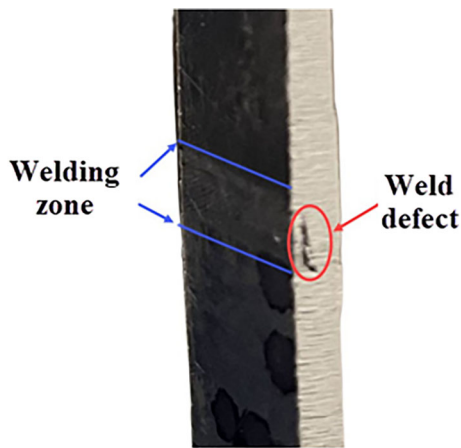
Bending test image of the AA2024-5754 welded sample
